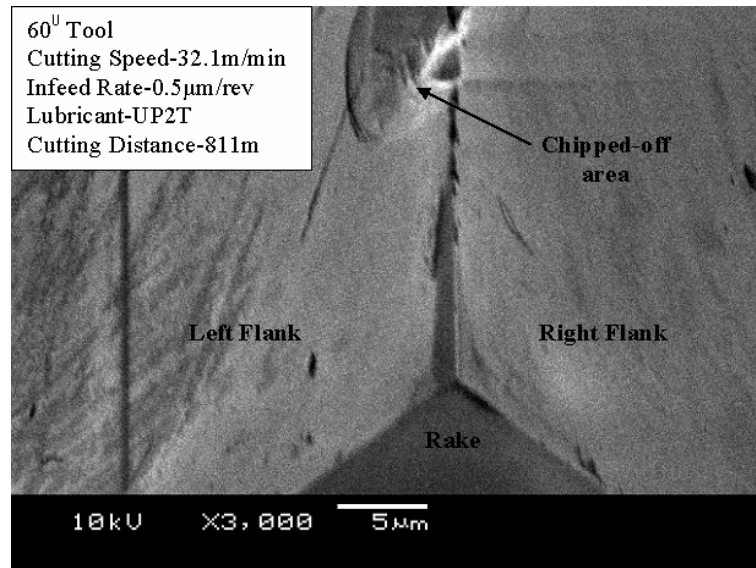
SEM image of a 60° tool (tool-2) after 811m cutting distance
